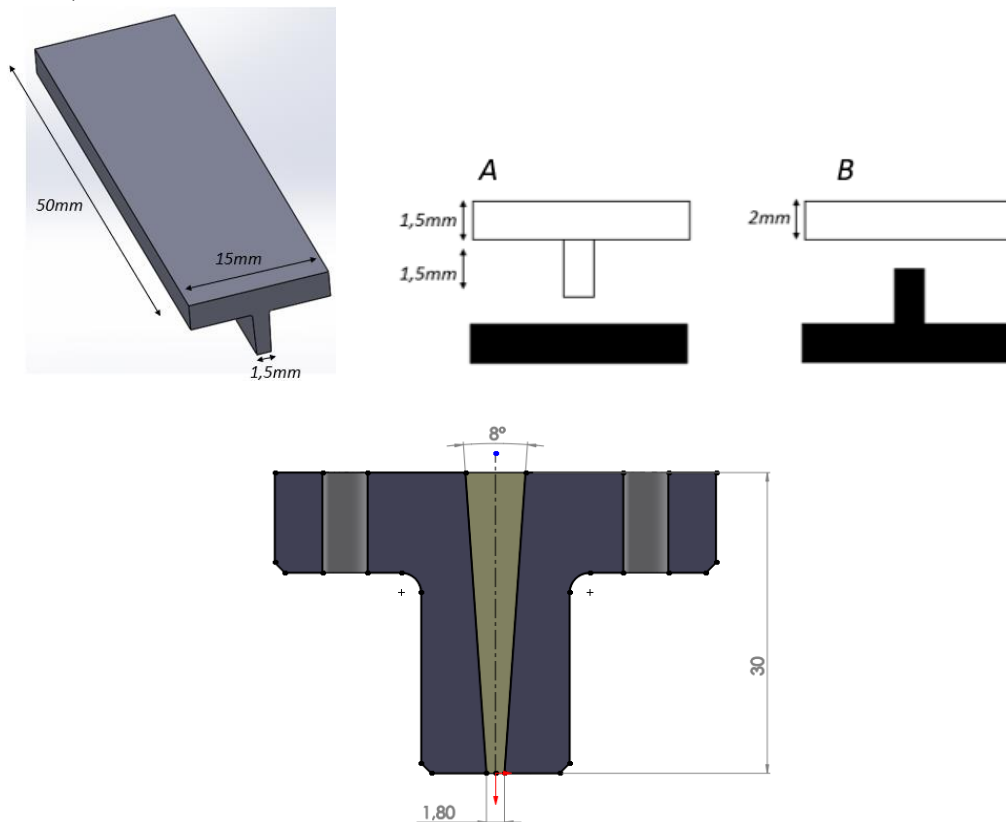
Dimensions for PA66 samples: a) Overall dimensions; b) First configuration testes; c) Second configuration tested; d) Waveguide
